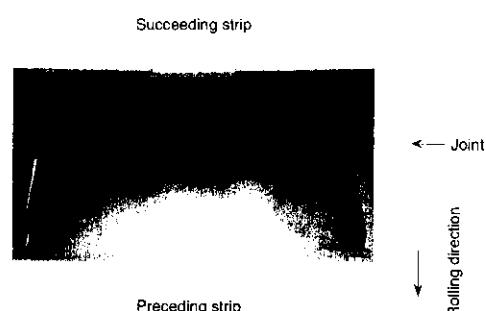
Joint in finish-rolled strip after deburring (strip size; 1200 w × 1.2 tmm)
